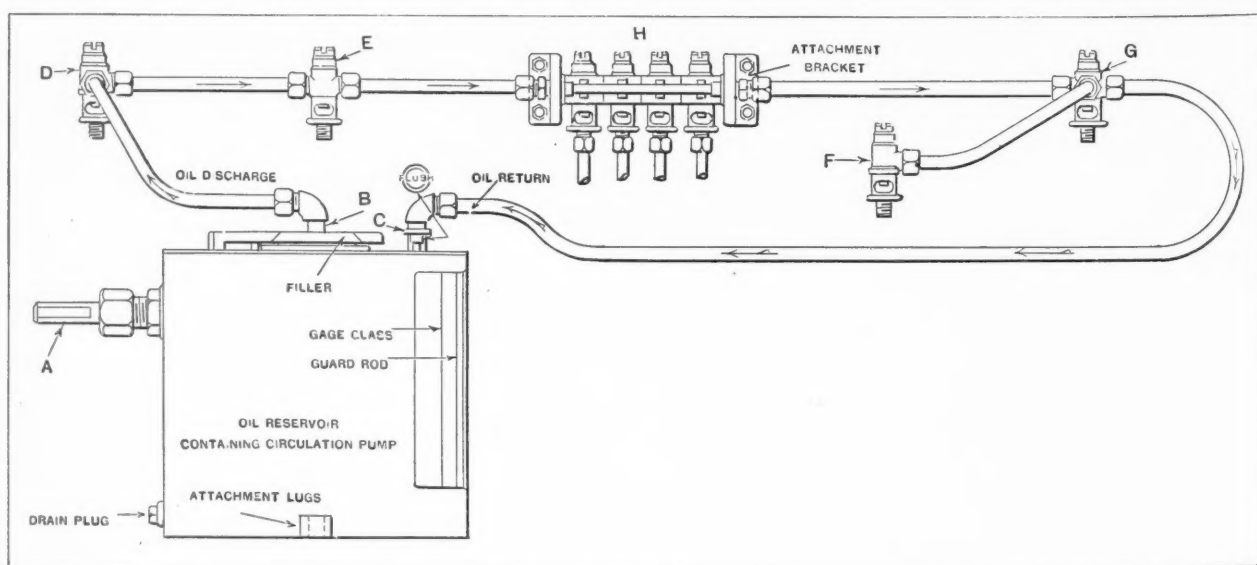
Blanchard Pulsating System for Oil Lubrication of Machine Tools and Production Machinery
